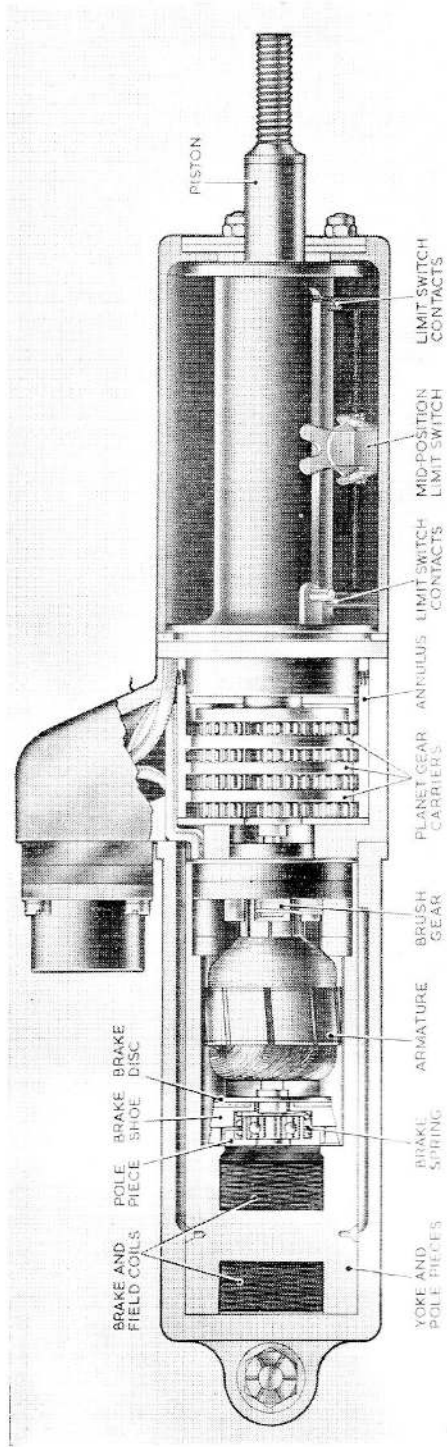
Sectional view of actuator, Type EJ50, Mk. 24
